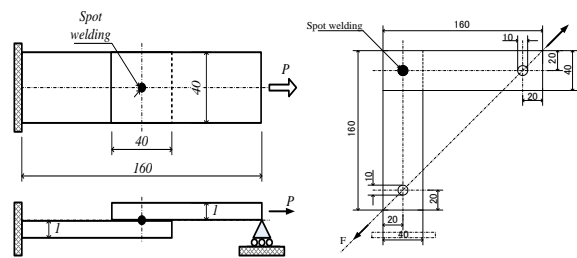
Spot welded joints for fatigue testing of tensile shear and torsional shear
